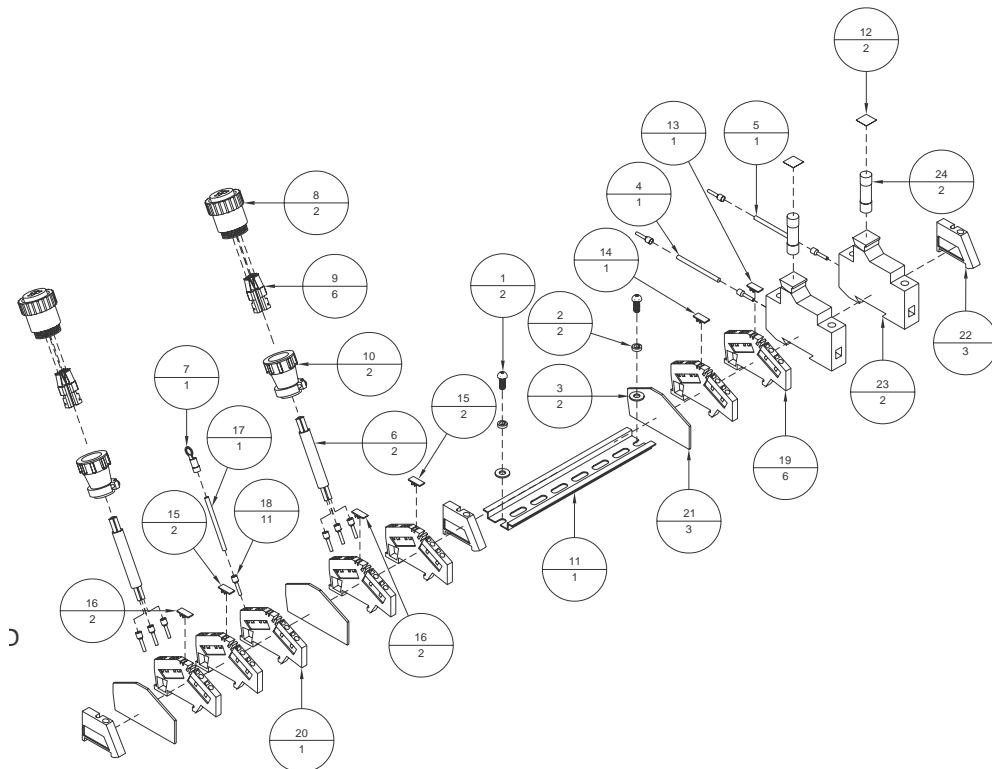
Terminal Block Assembly, Main, BK1700 (9103447A)
